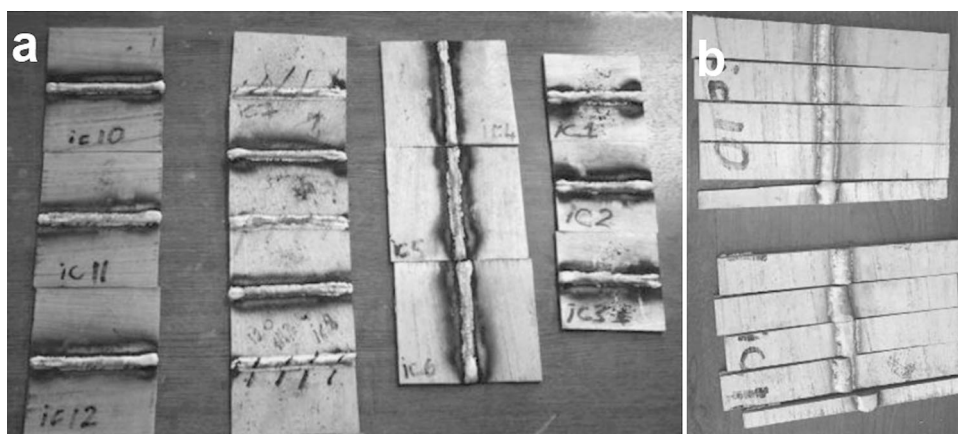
Welded plates and obtained tensile test specimens.
